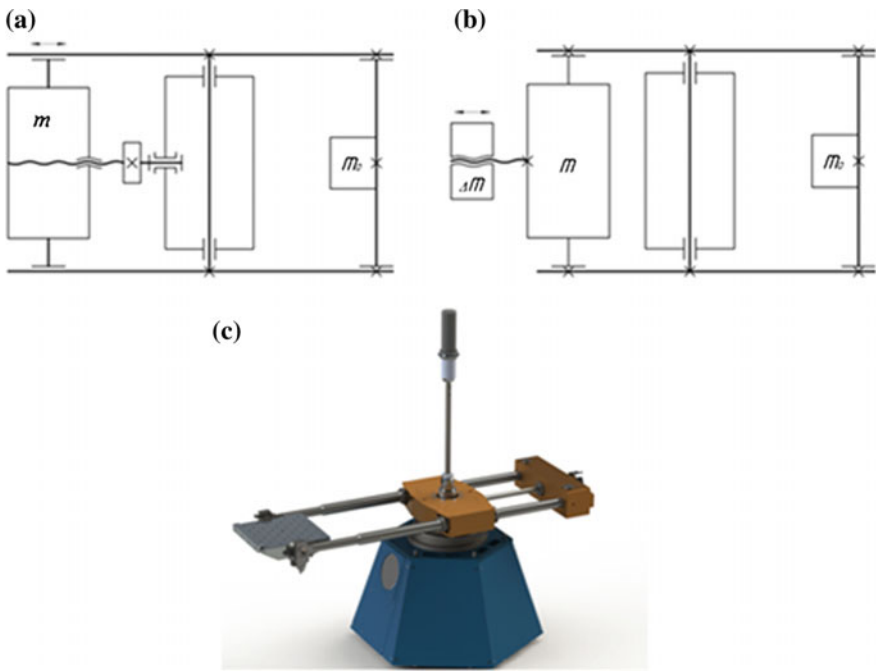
Devices for manual balancing of rod swinging rotors with screw mechanisms: a balancing using a large counterweight; b diagram of accurate balancing with a small counterweight; c PC19 centrifuge with a swinging rotor, manufactured by Deltamec (RF)
